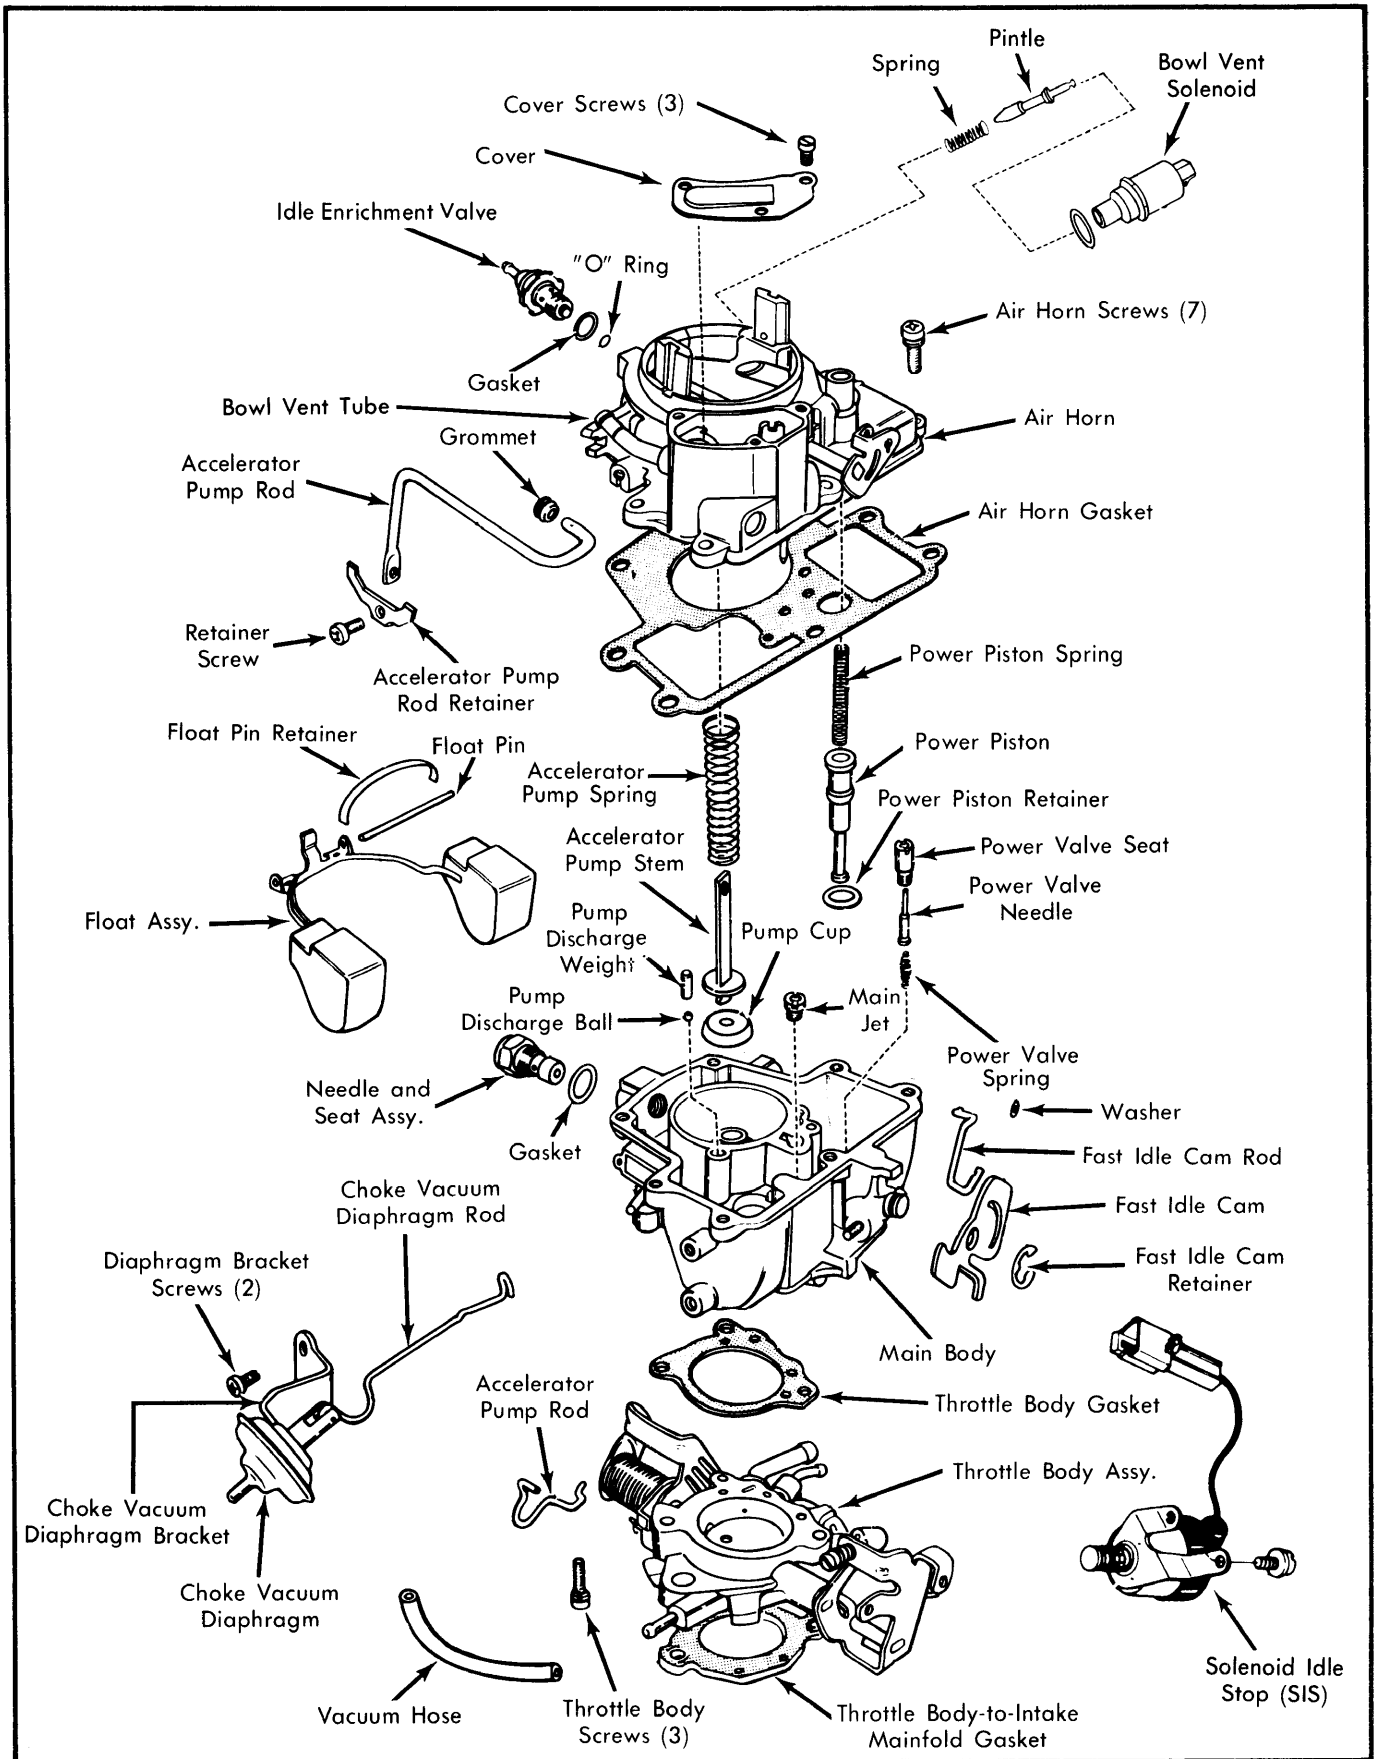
Exploded View of Holley Model 1945 Single Barrel Carburetor
